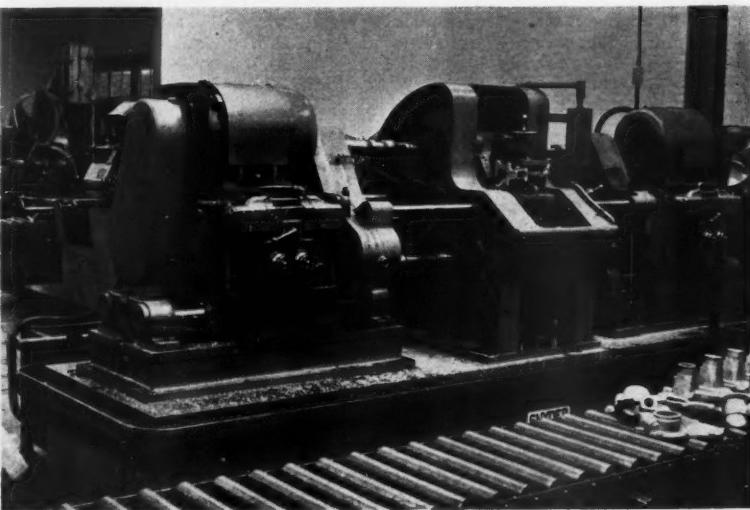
A Snyder four-station, double end trunnion machine for the first operations on gearbox rear end covers
